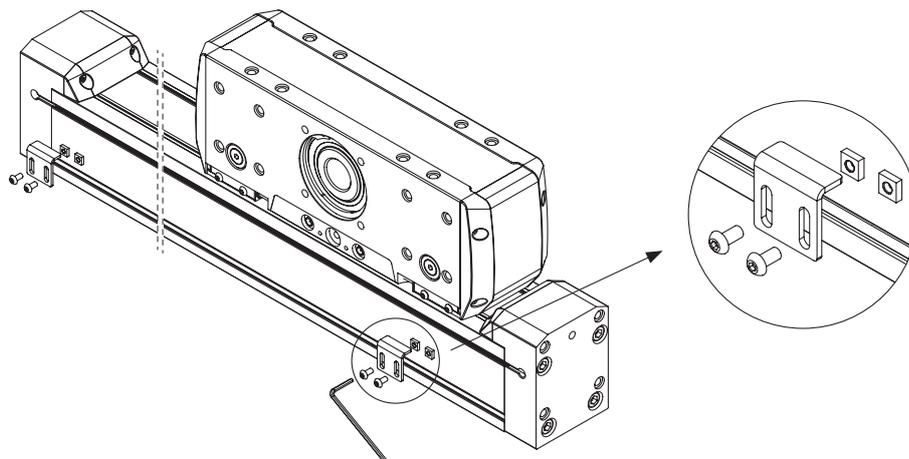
Mounting the damping elements – HC060B and HC080B (without spacer plates)
